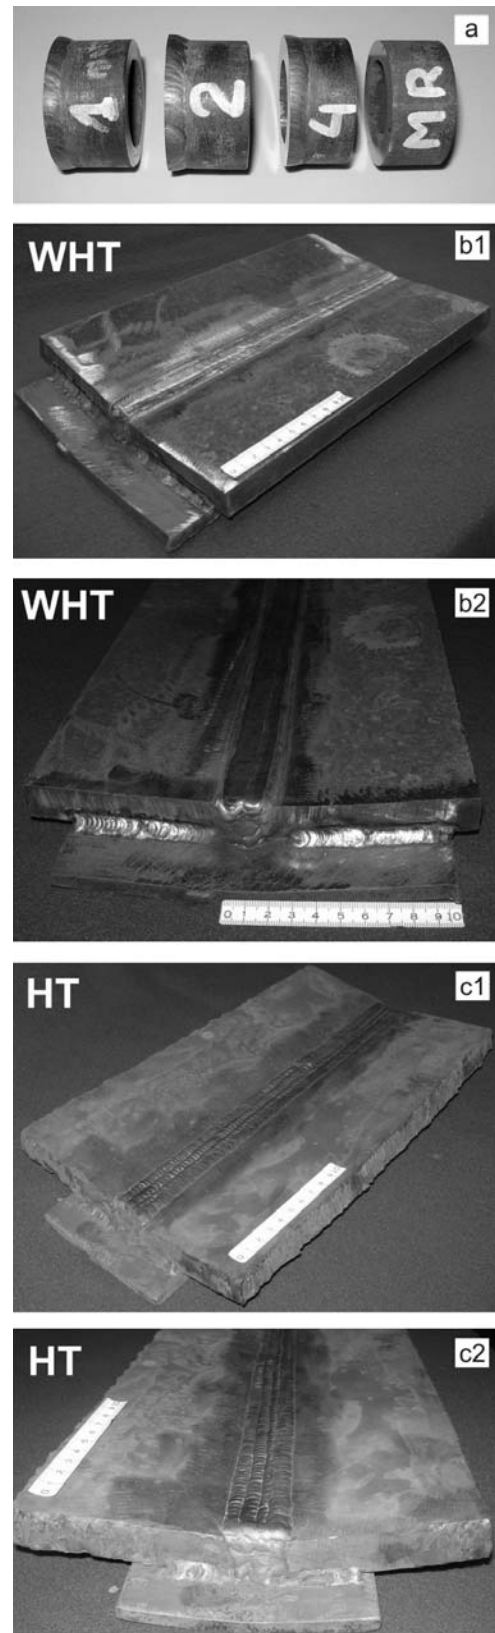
Main view of specimens: a) fragments of circumferential butt welded joints and base metal of pipes made of T91 steel, b) test plate of weld deposit not heat treated, c) test plate of heat treated weld deposit.
